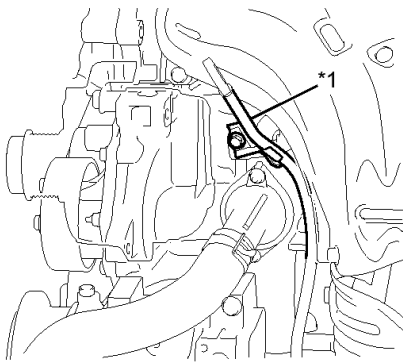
Identifying Cylinder Head Gasket Replacement Components With Torque Specifications (13 Of 13)
